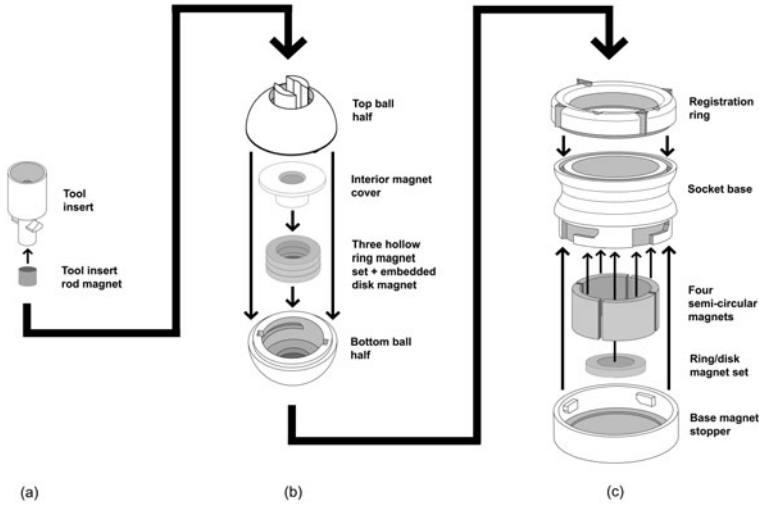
Exploded view of the base showing (a) the tool insert, (b) the ball, and (c) the socket, along with the internal magnets
